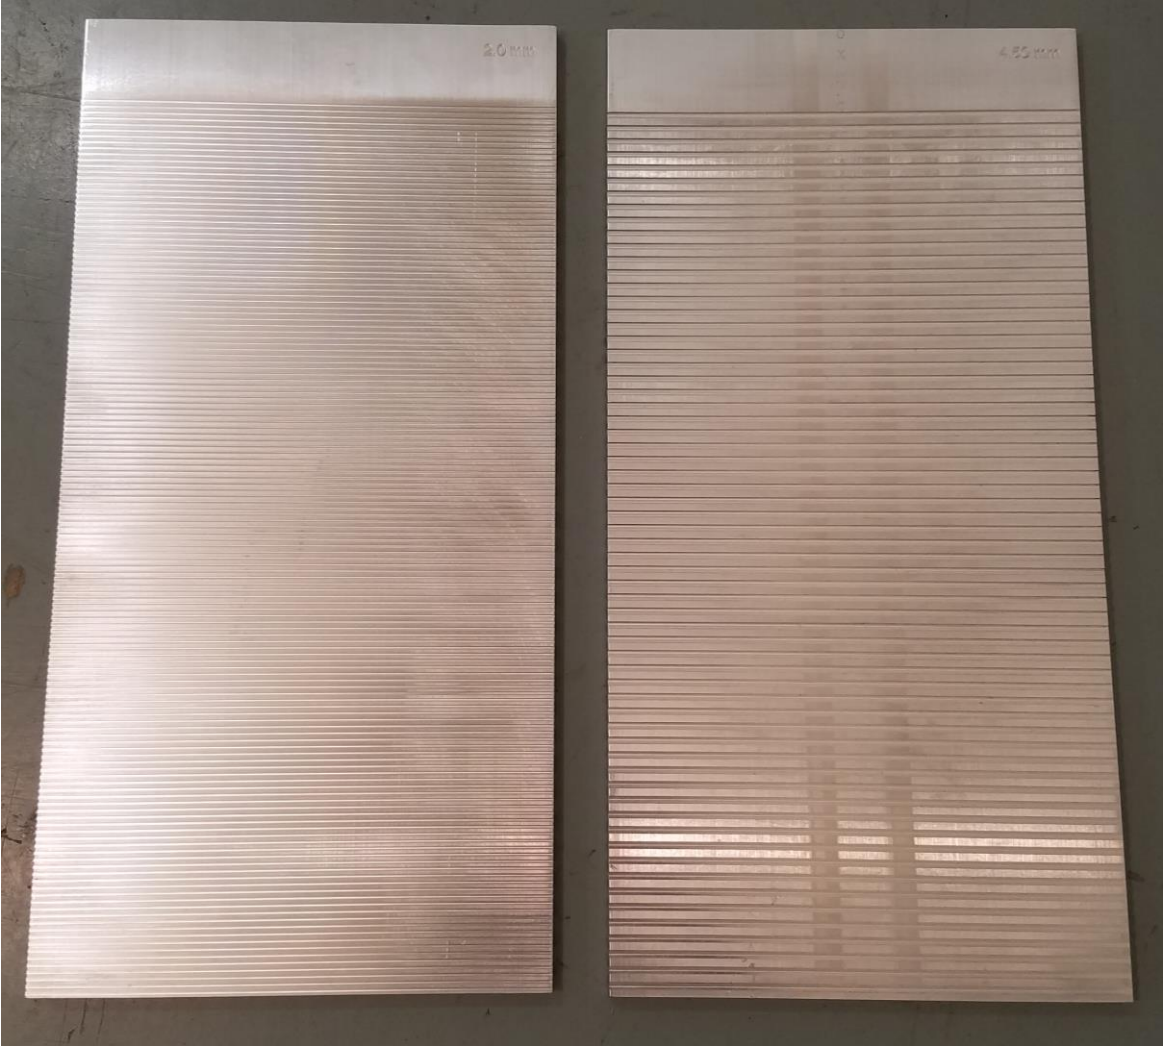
Two millimeter (left) and 4.5 millimeter (right) grooved aluminum plates.
